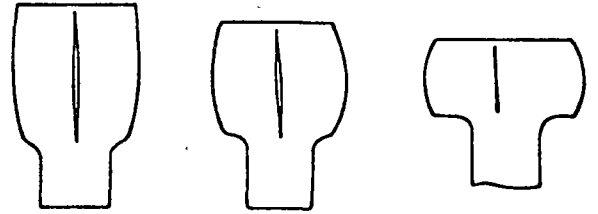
Typical forging defects. (a) Cracking at the flash; (b) cold shut or fold; (c) internal cracking due to secondary tensile stresses.
